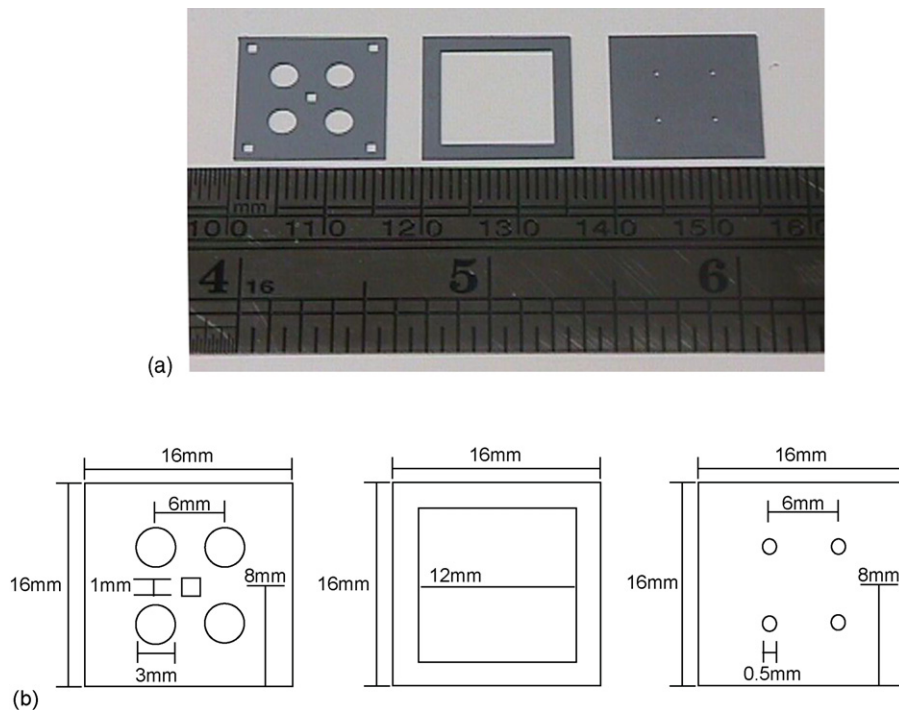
Actuator, spacer, and orifice chips prior to assembly. (a) Photograph of the actuator, spacer, and orifice chips prior to pneumatic modulator assembly. (b) Diagram of the three chips including feature dimensions.
